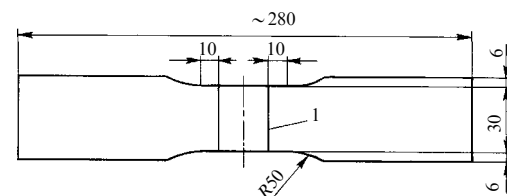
Tensile test specimen: 1 - weld edge
